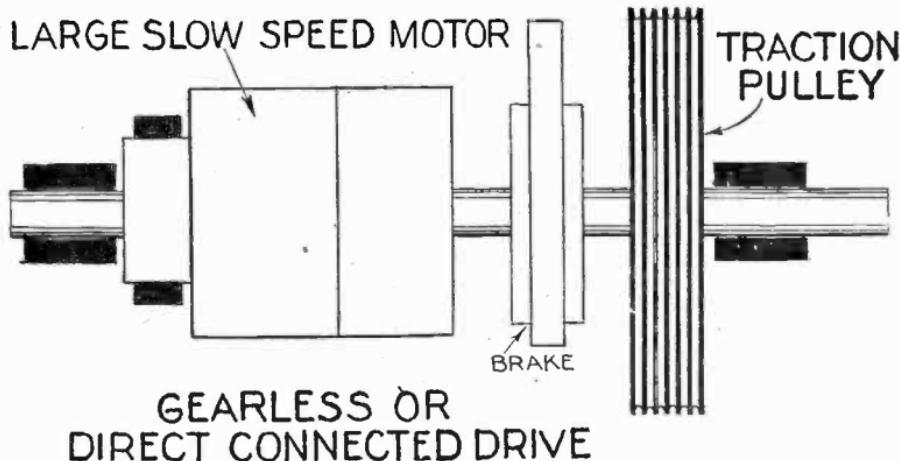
,739.—Elementary elevator machine with gearless or direct connected drive. A large slow speed motor is required.
